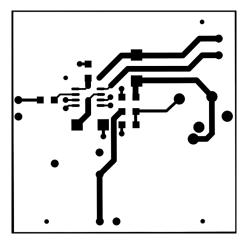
Recommended SOIC PC Board Layout: Component Side Layout
